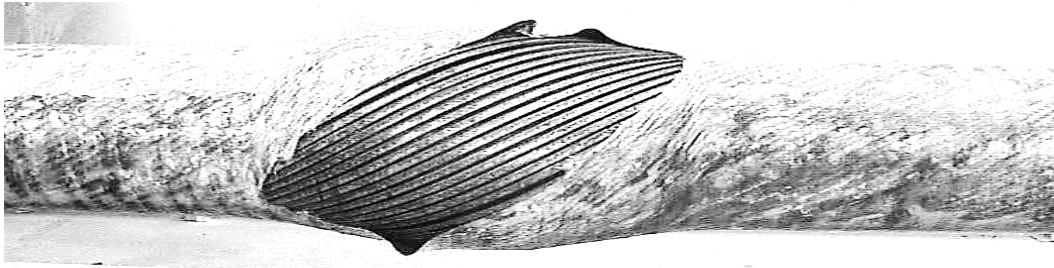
Bird cage' failure caused by excessive axial compression load [38]
